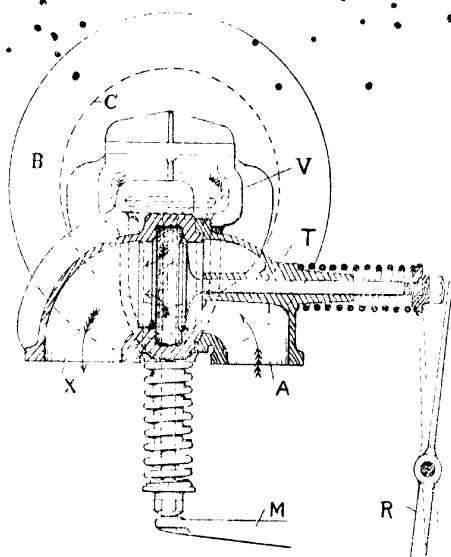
Lanchester single valve with double-seated admission and exhaust control.
